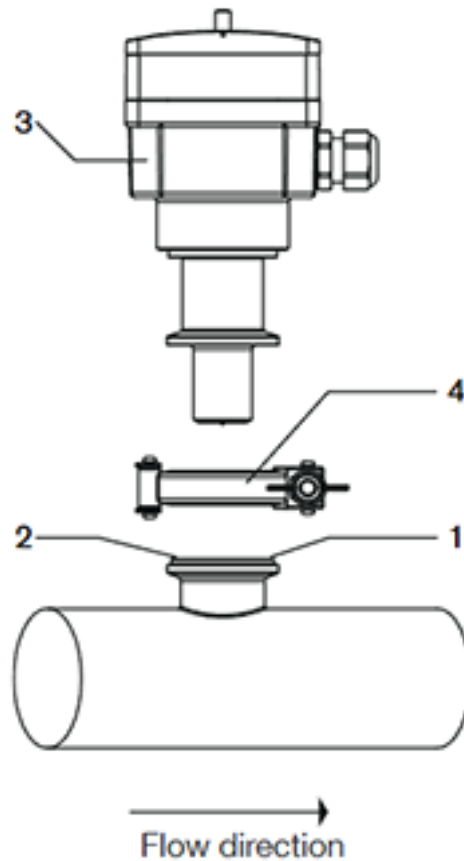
Installation into the pipe of a 8041 with a clamp connection
